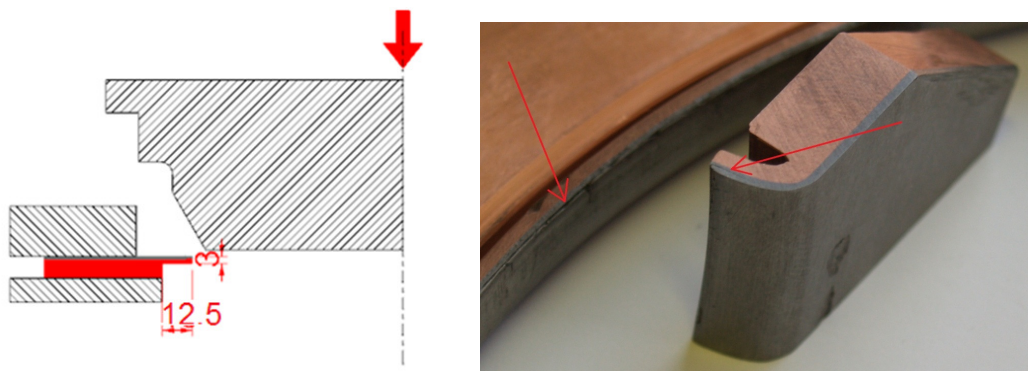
Press tooling used for forming the edge of the driver hole accordingly to the design of the Plasma Driver Plate (left) and picture of the formed part (right)
